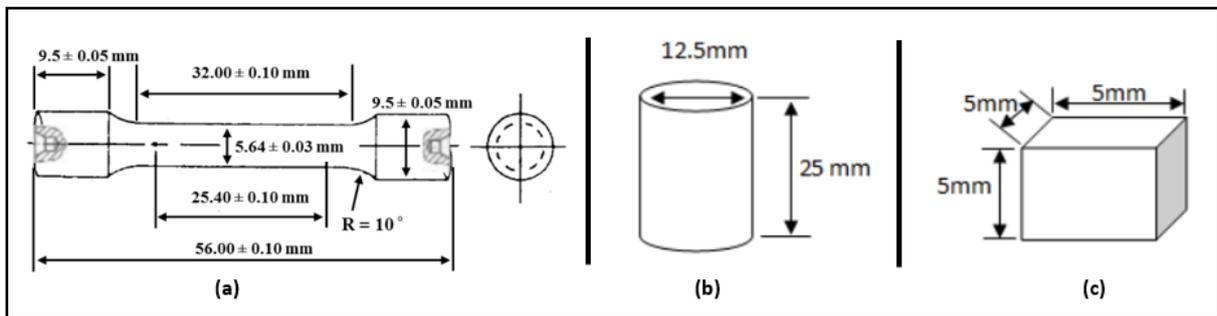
(a) Tensile Test Specimen (b) Compressive Test Specimen (c) Hardness Test Specimen (Pelleg, J. 2012).
